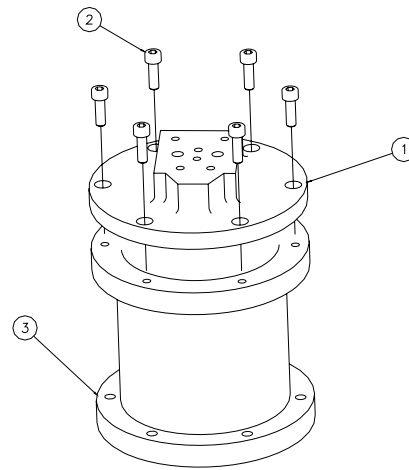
AGMD-279-US90 Single Head Adapter Parts Identification (Top View)
